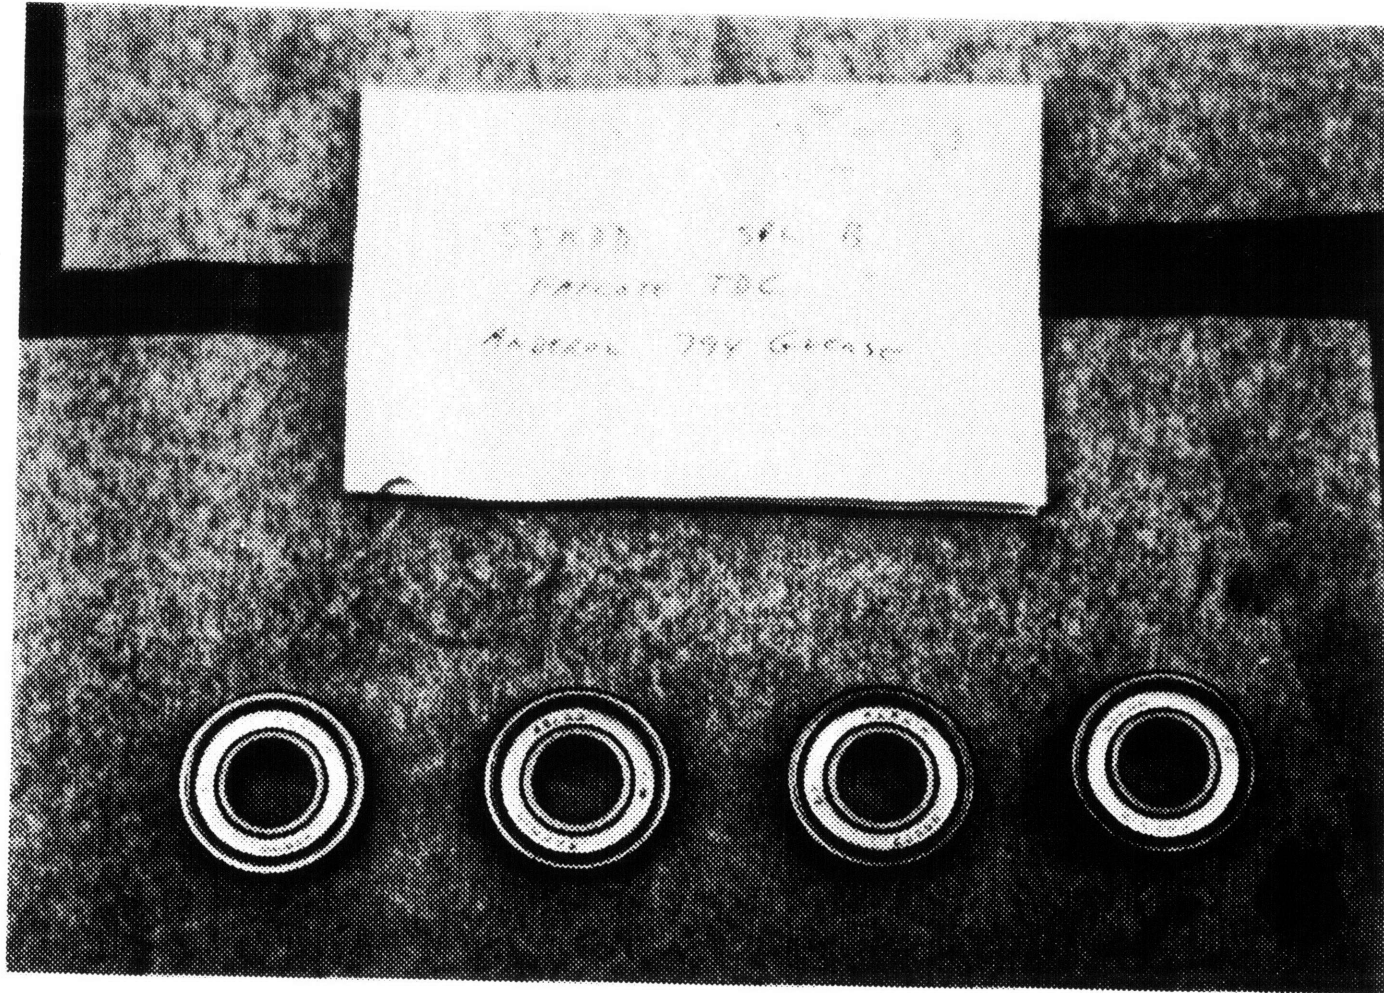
Fafnir "Fafcote" bearings lubricated with Anderol 794 grease
